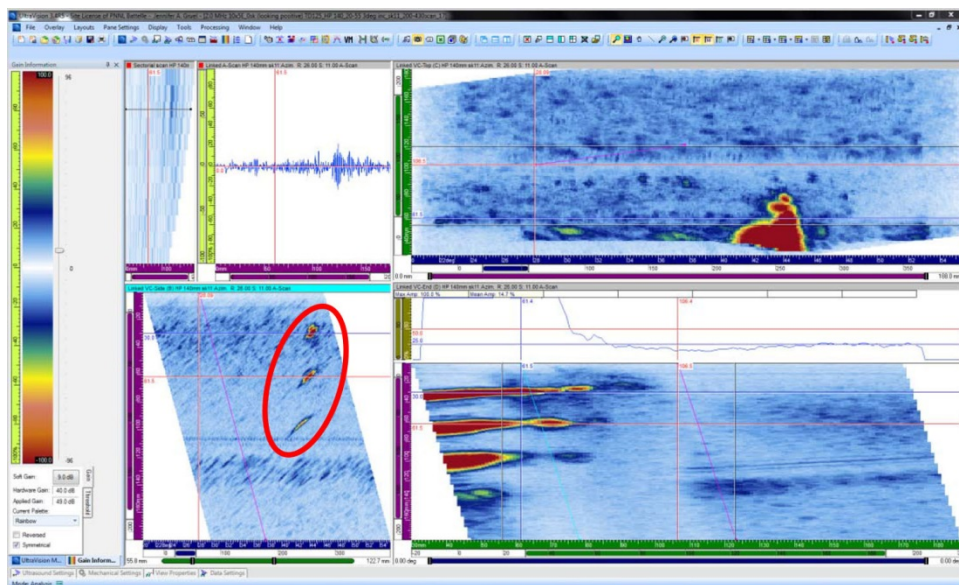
CCW, Skew 0, Reduced Gain. Three side-drilled holes are visible and circled in red.
